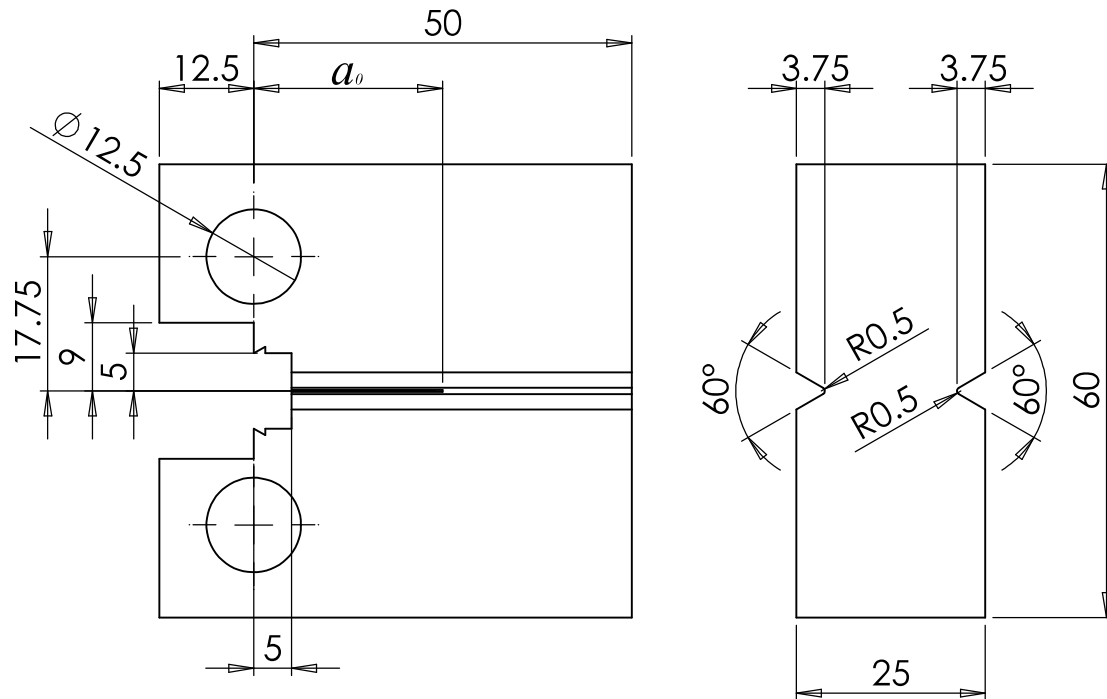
C(T) specimen geometry used for fracture toughness testing (dimensions in mm)
